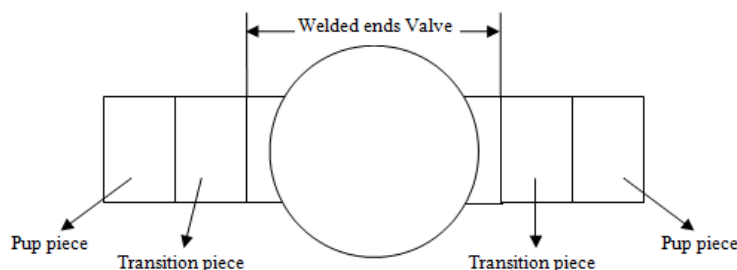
Butt Welding Ends Valves: Detail of Transition and/ or Pup Pieces Requirements
